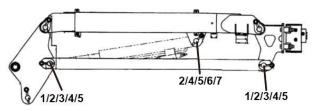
Assembly of piston rod and lower arm connecting frame and lower connecting rod
